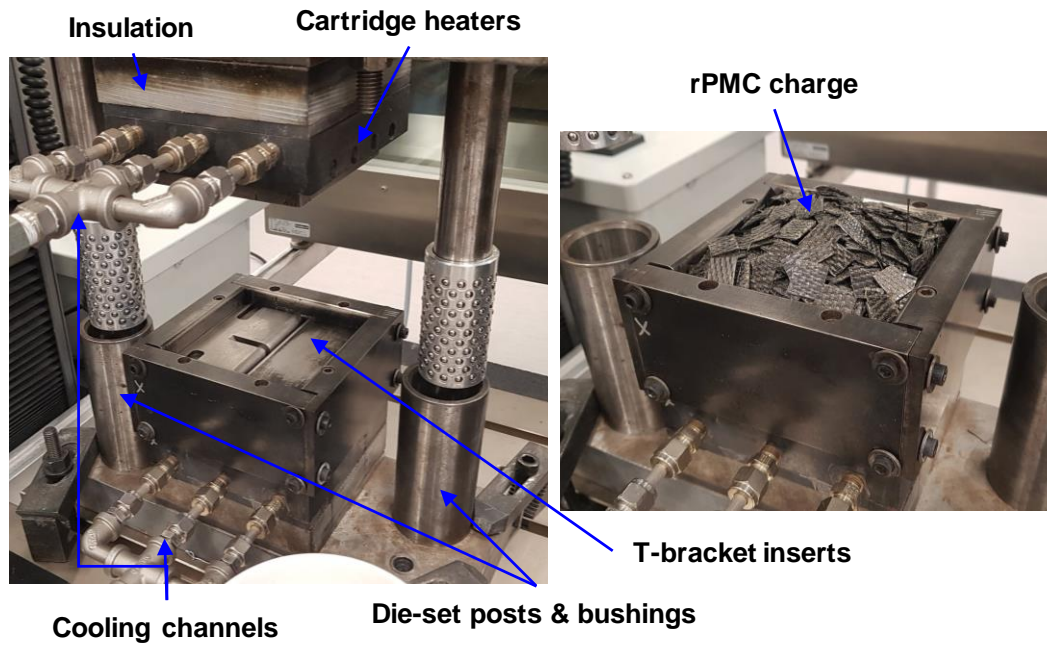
The instrumented picture frame mould with compound T-bracket inserts installed (left) and following the placement of an rPMC charge (right).
